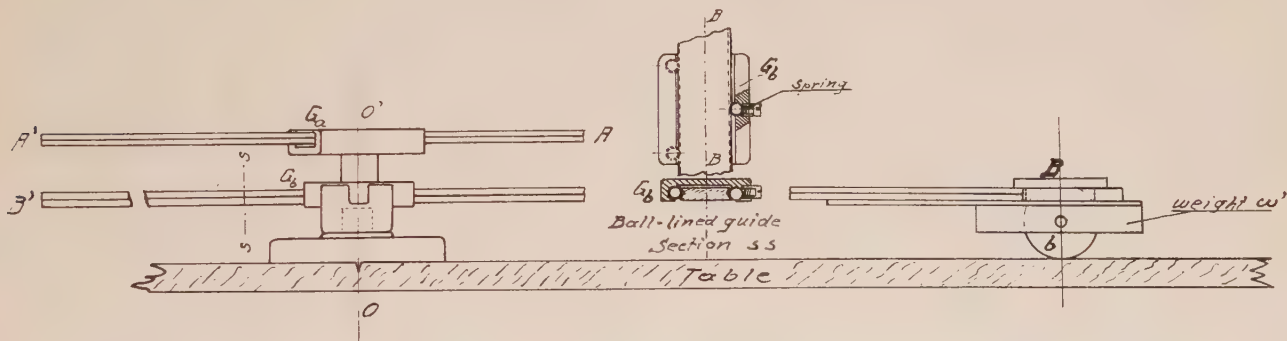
A SIDE VIEW SHOWING AN IMPROVED CENTER PIECE SLIDERS AND WHEEL SUPPORT
